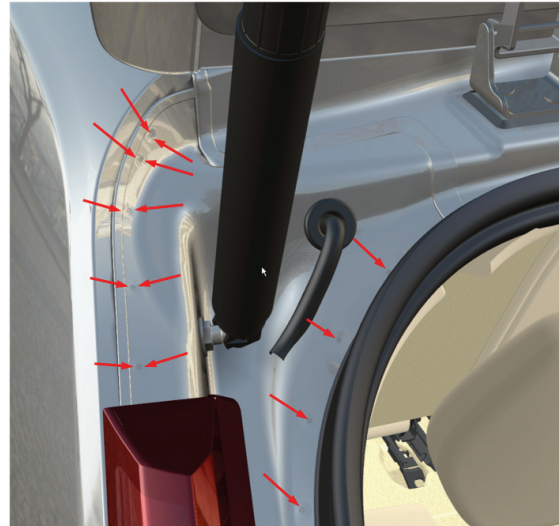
Illustrative example of visible weld spots on the complete vehicle
